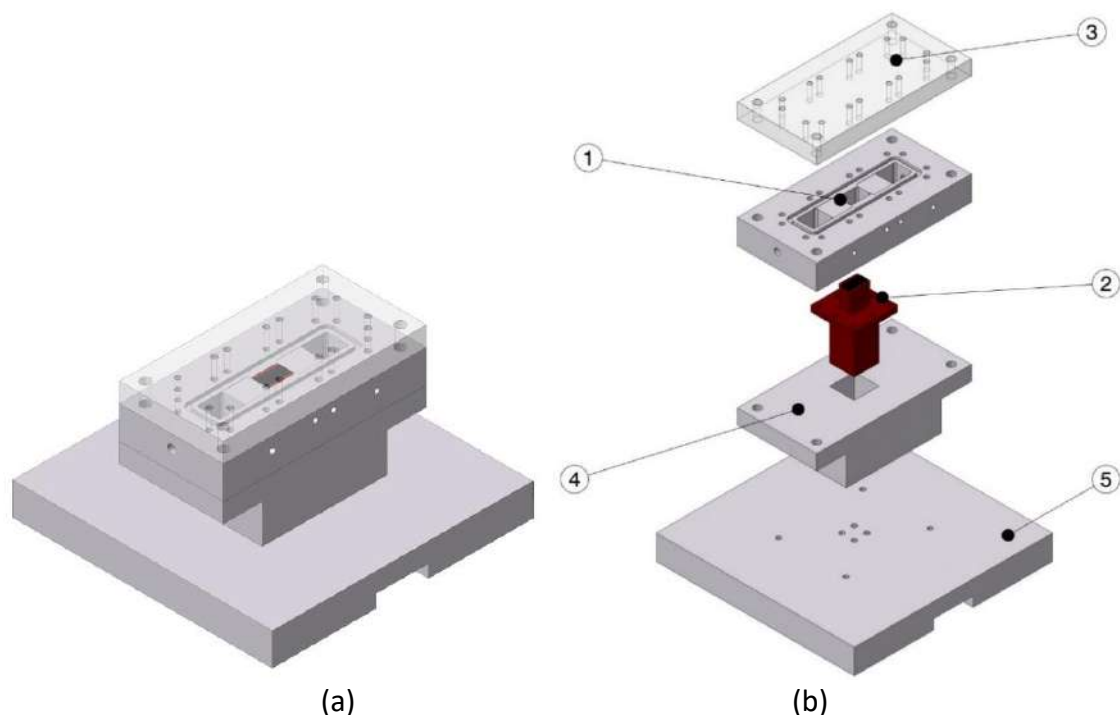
The test rig of the optimised TC-RR-SC MCHS (a) Test rig design (b) Exploded view of test rig
